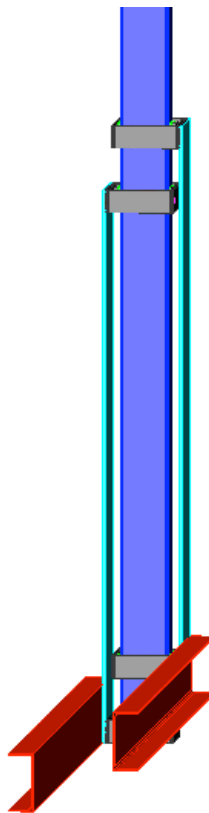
Hoist concept 3, view of one upright showing lifting arms and bearing assemblies.
